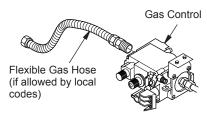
Attaching Flexible Gas Hose to Heater Gas Regulator (Remote-Ready Models Only)
